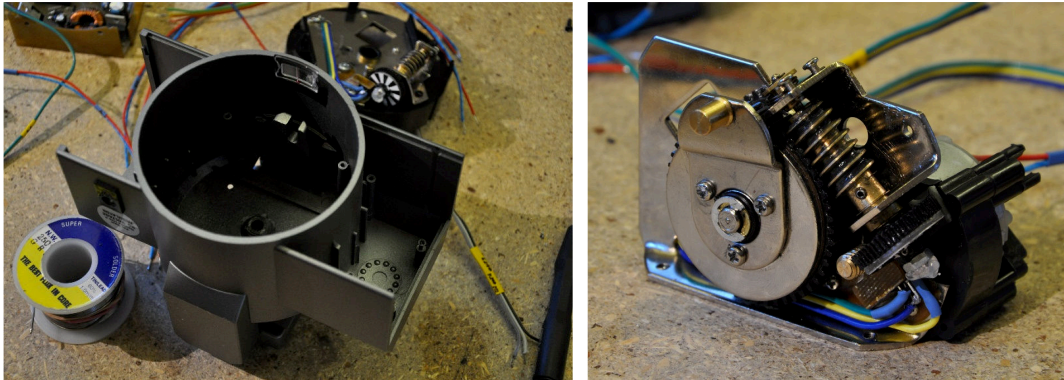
Left: Plastic box of the head without electronics, motors and gears, Right: Double worm gear with DC motor
